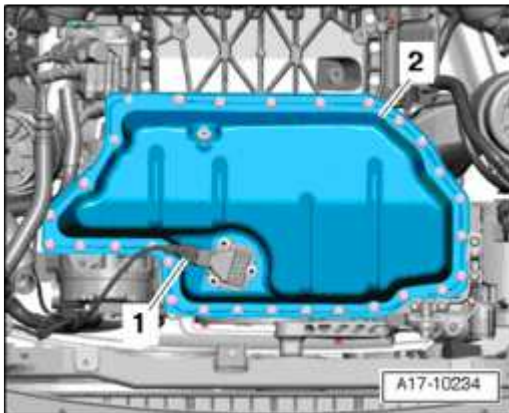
Identifying Oil Level Thermal Sensor G266 Electrical Connector & Oil Pan (Lower Part)
